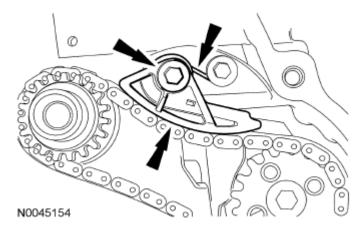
Locating Oil Pump Chain Drive Tensioner Shoulder Bolt Courtesy of FORD MOTOR CO.
